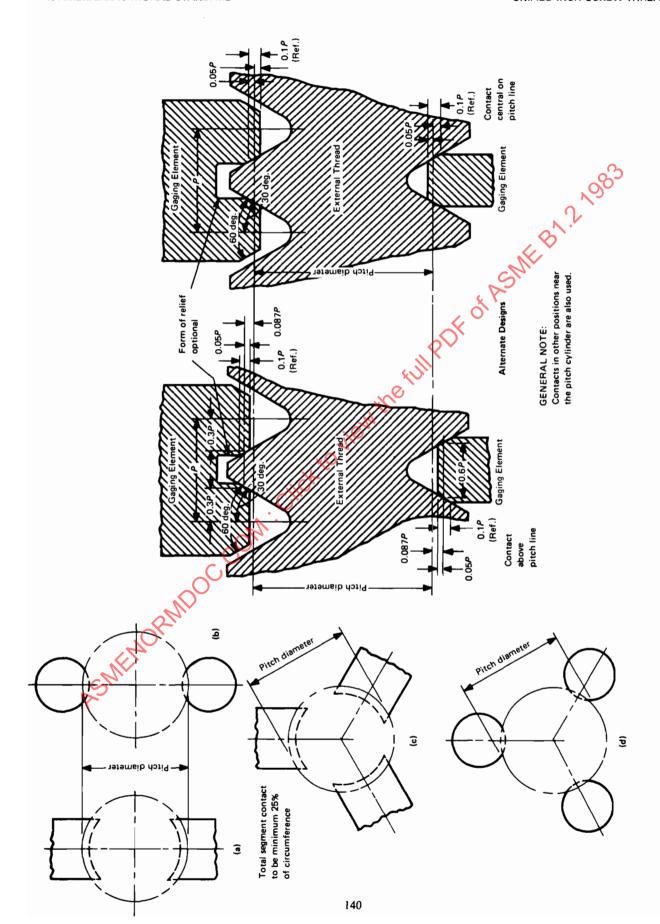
INDICATING THREAD GAGES — MINIMUM-MATERIAL PITCH DIAMETER LIMIT AND SIZE — CONE AND VEE
